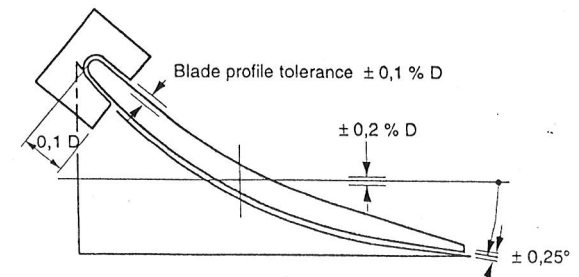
Runner/impeller of axial flow machine. Definition of blade adjustment and of blade profile tolerances
